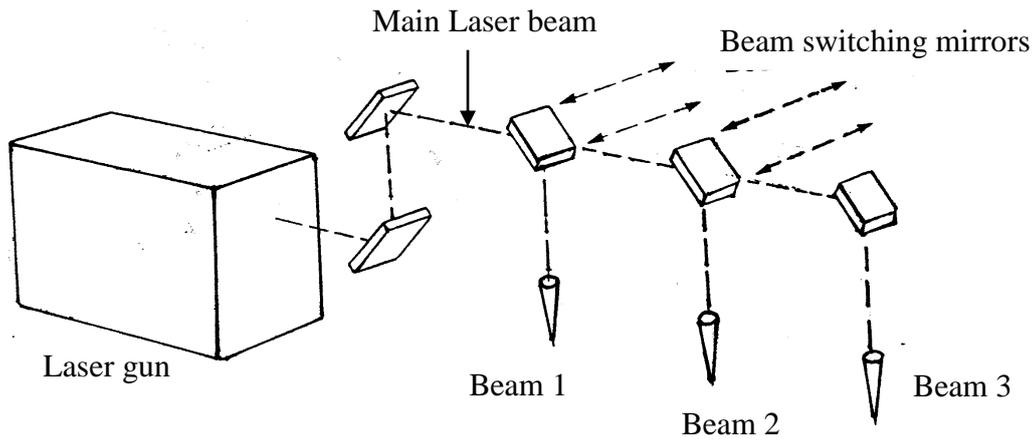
Laser beam time-sharing by inserting fully reflecting mirrors sequentially into the laser beam path. [33]
